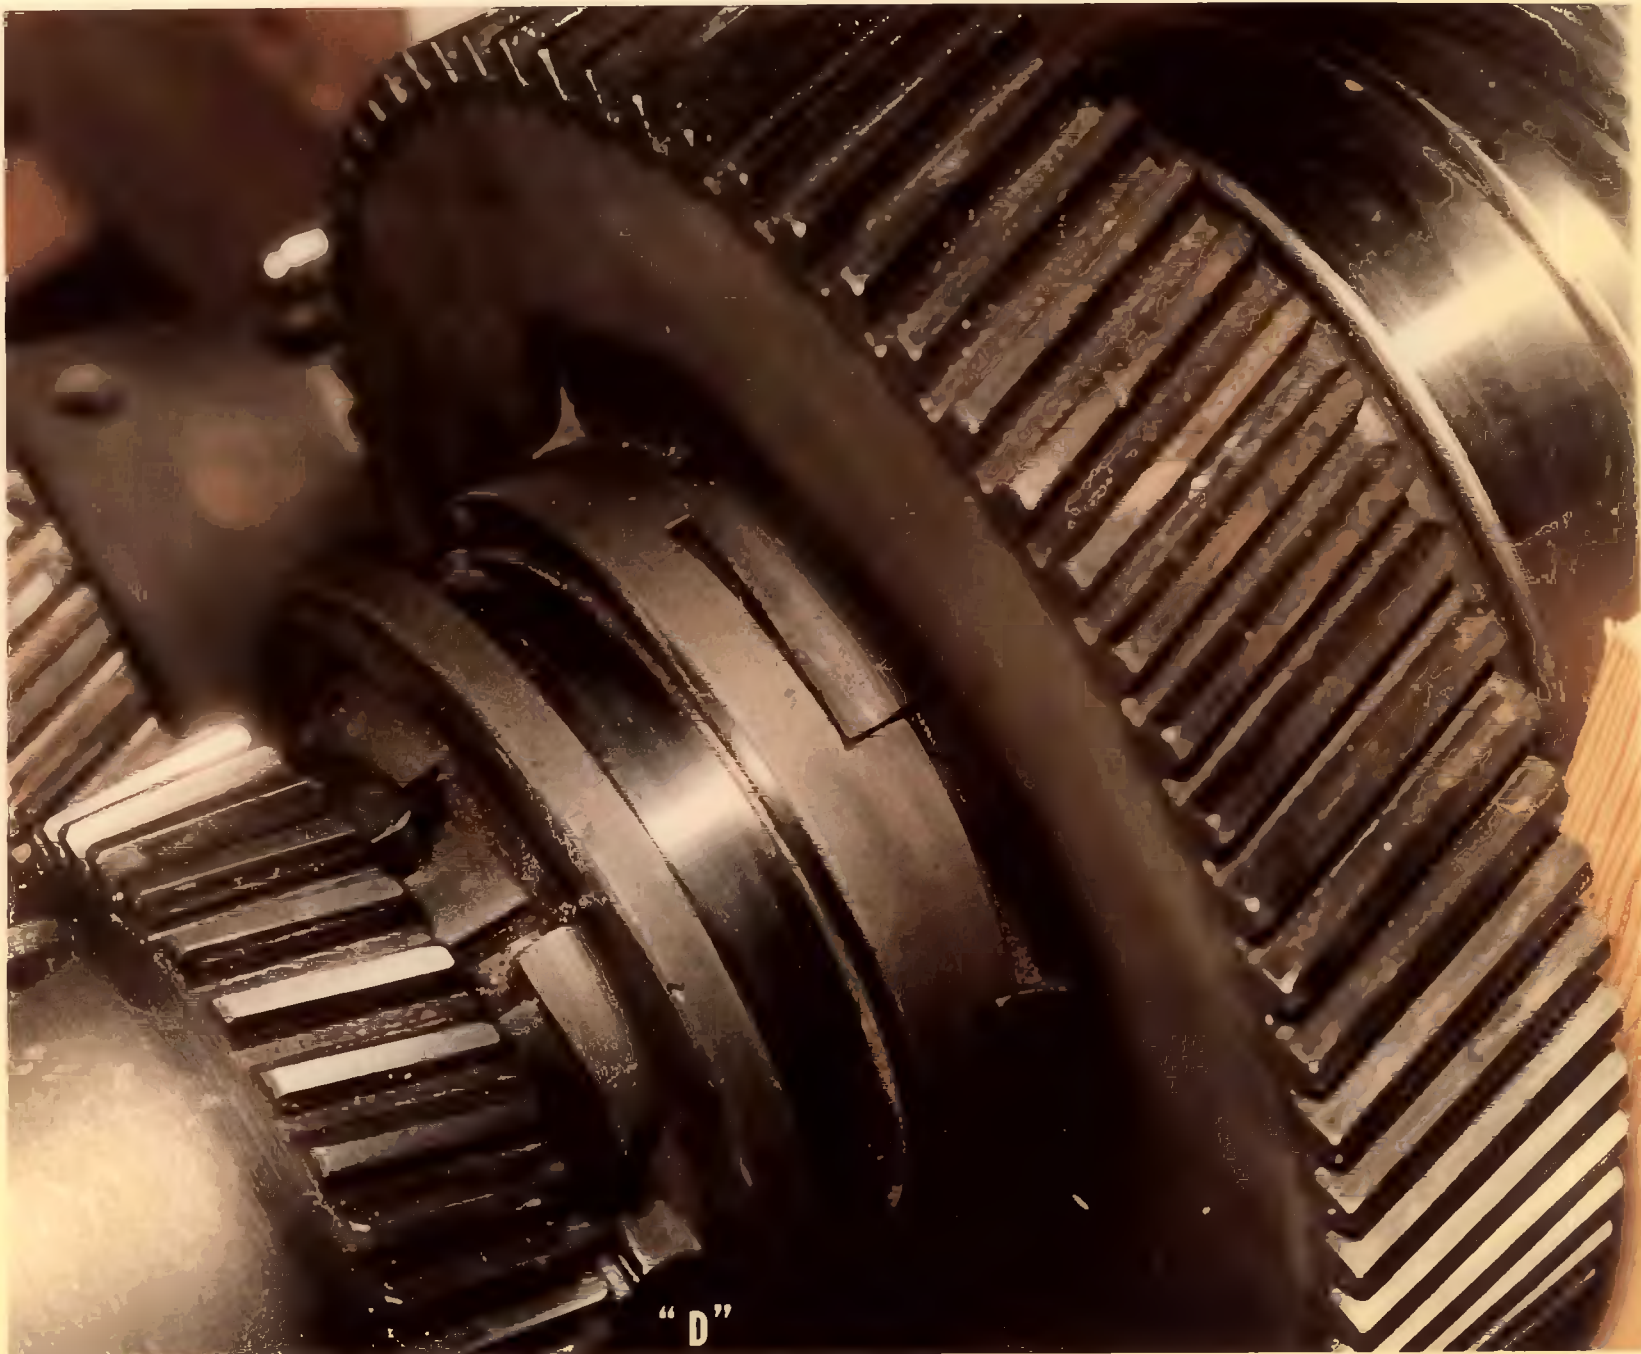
Engaged Clutch "D" in Gear Train Assembly
